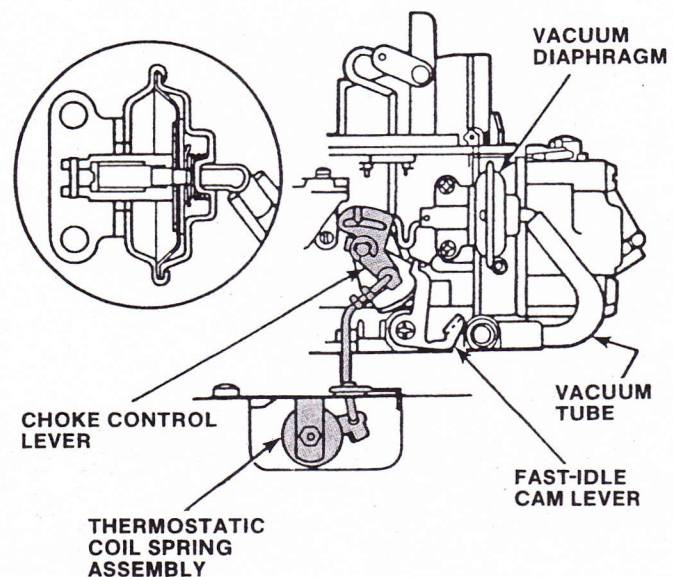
Divorced choke thermostatic element mounted in heat well.
